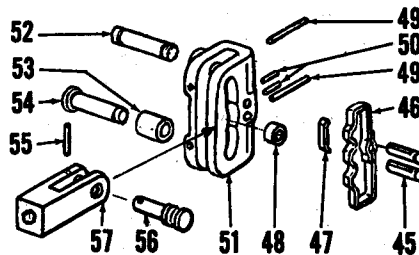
Exploded view of draft/position control guide and detent mechanism. Head of pin (56) detents in notches formed in spring (46). Spring is mounted in split pins (45) which are retained in guide (51) by roll pins (50). Roller (53) engages yoke on draft control lever (18—Fig. 226).
